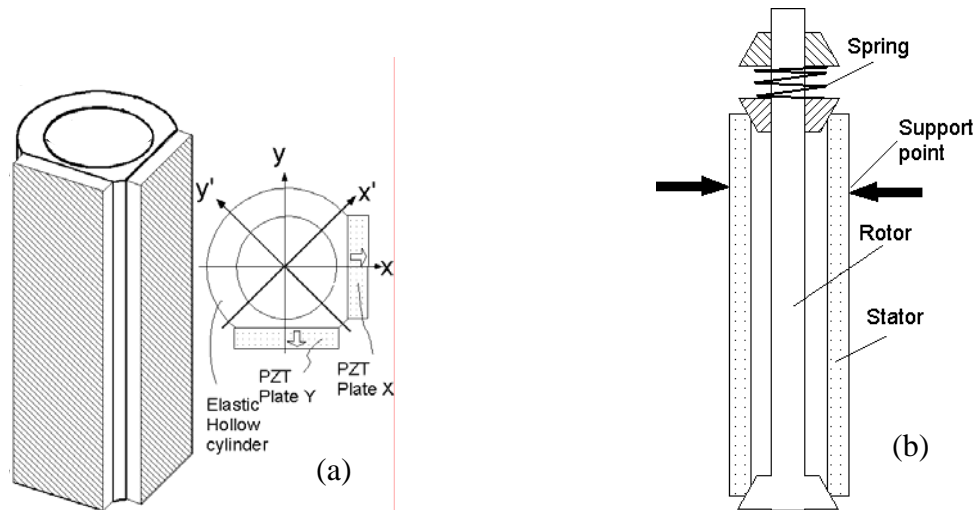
(a) Structure of the stator (b) Assembly of the motor.
